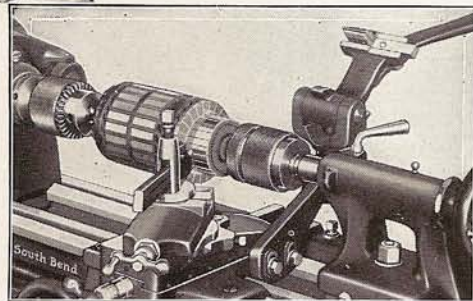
Truing the Commutator. Undercutter Attachment is Thrown Back Out of Way.
